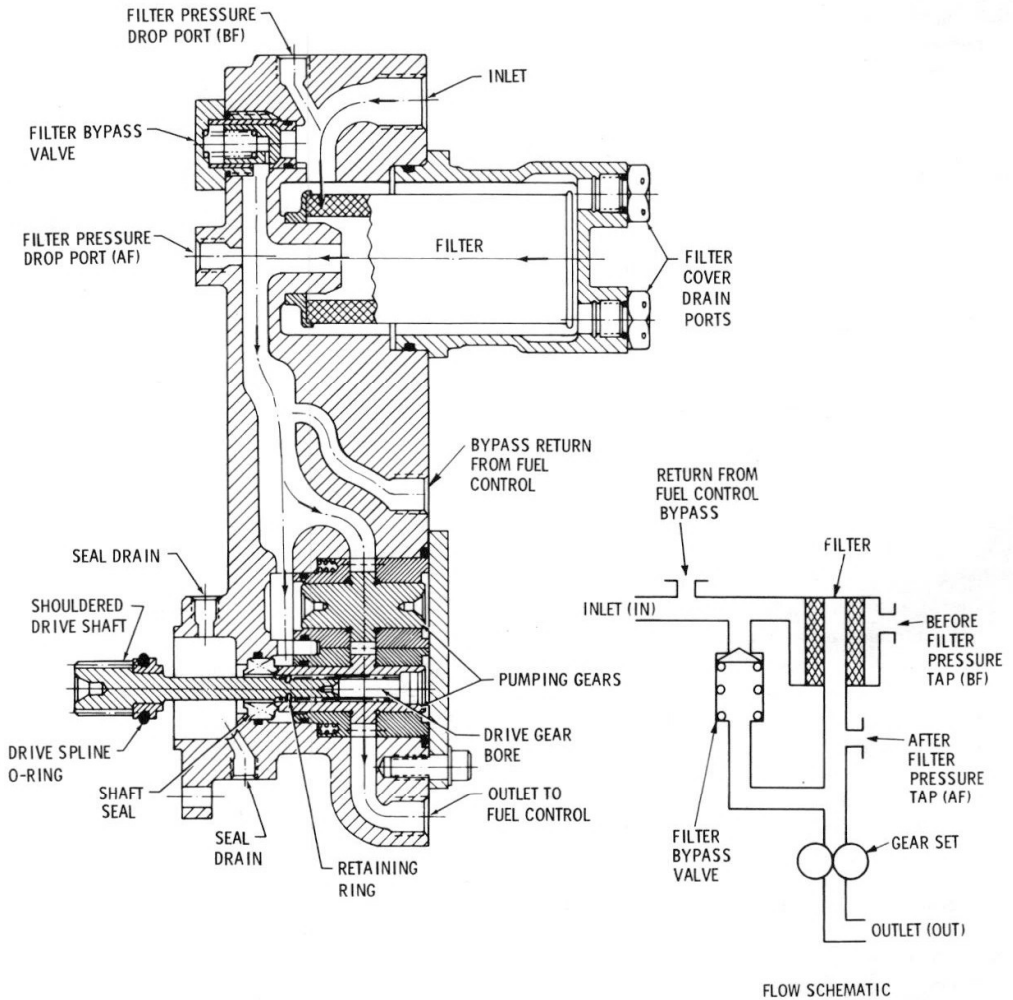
A. Single Element Fuel Pump Assembly (TRW)
